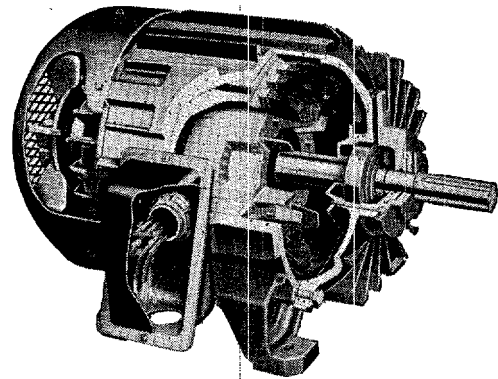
Sectional view through typical general-purpose, totally-enclosed, fan-cooled cage motor.
